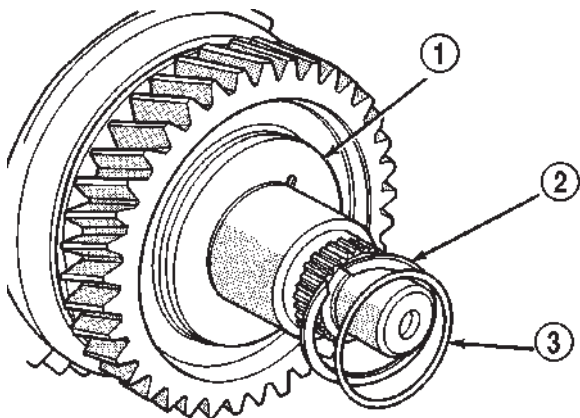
Snap Ring And Third Gear Bearing Spacer
